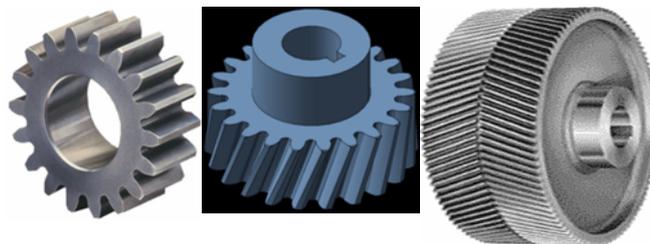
Spur Gear Fig 2: Helical Gear Fig 3: Double Helical Gear
